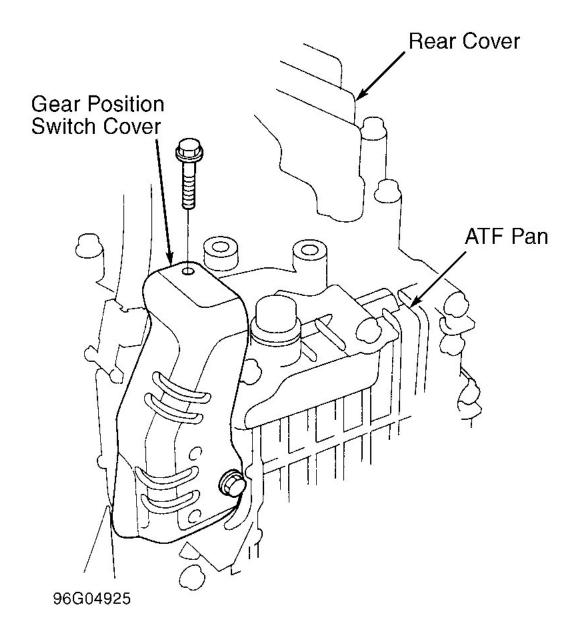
Installing Gear Position Switch Cover Courtesy of AMERICAN HONDA MOTOR CO., INC.
